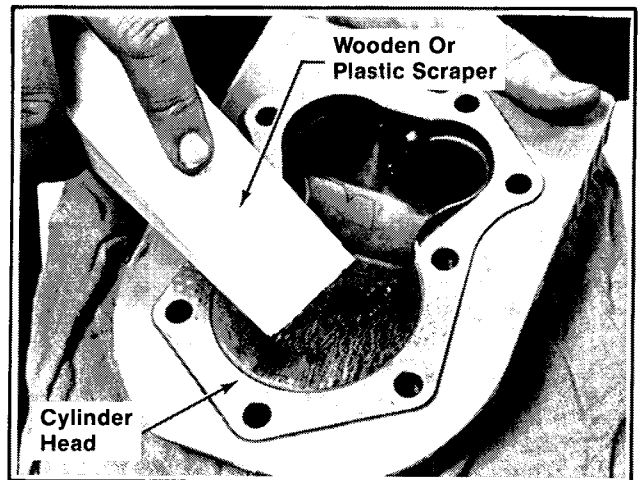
Cleaning Cylinder Head And Combustion Chamber.
